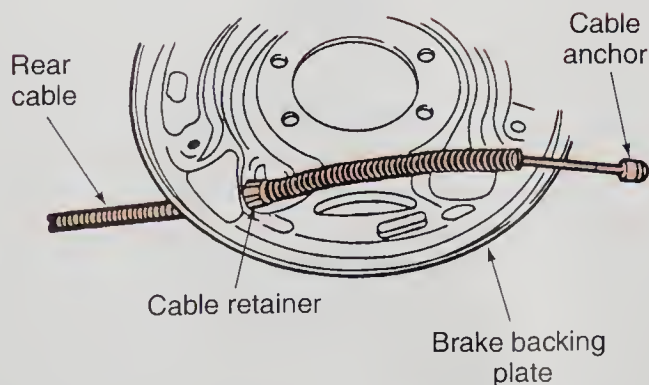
A cable retainer secures the conduit to the backing plate.
